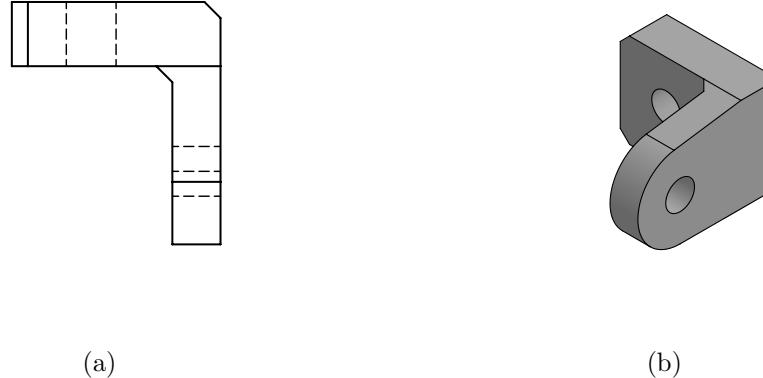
Detailed drawings of the single axis hinge component in the differential system
